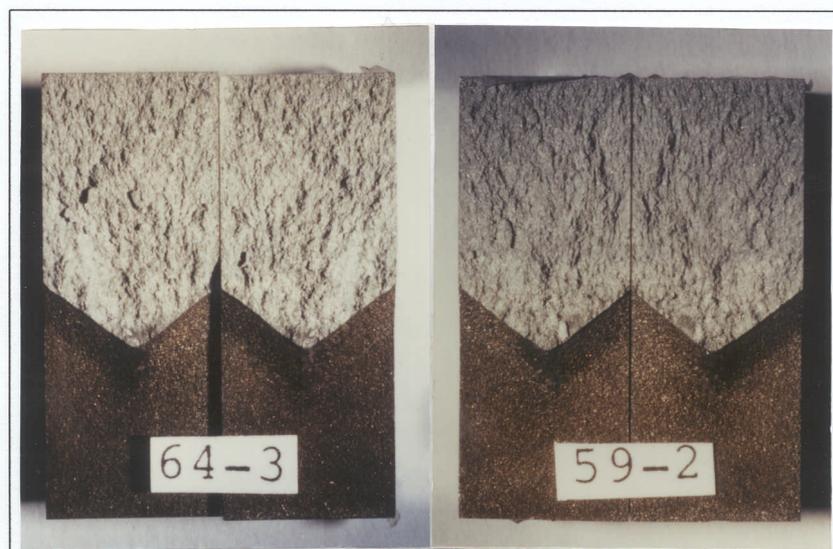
Fracture surface of a K_{IC} tested specimen at room temperature
